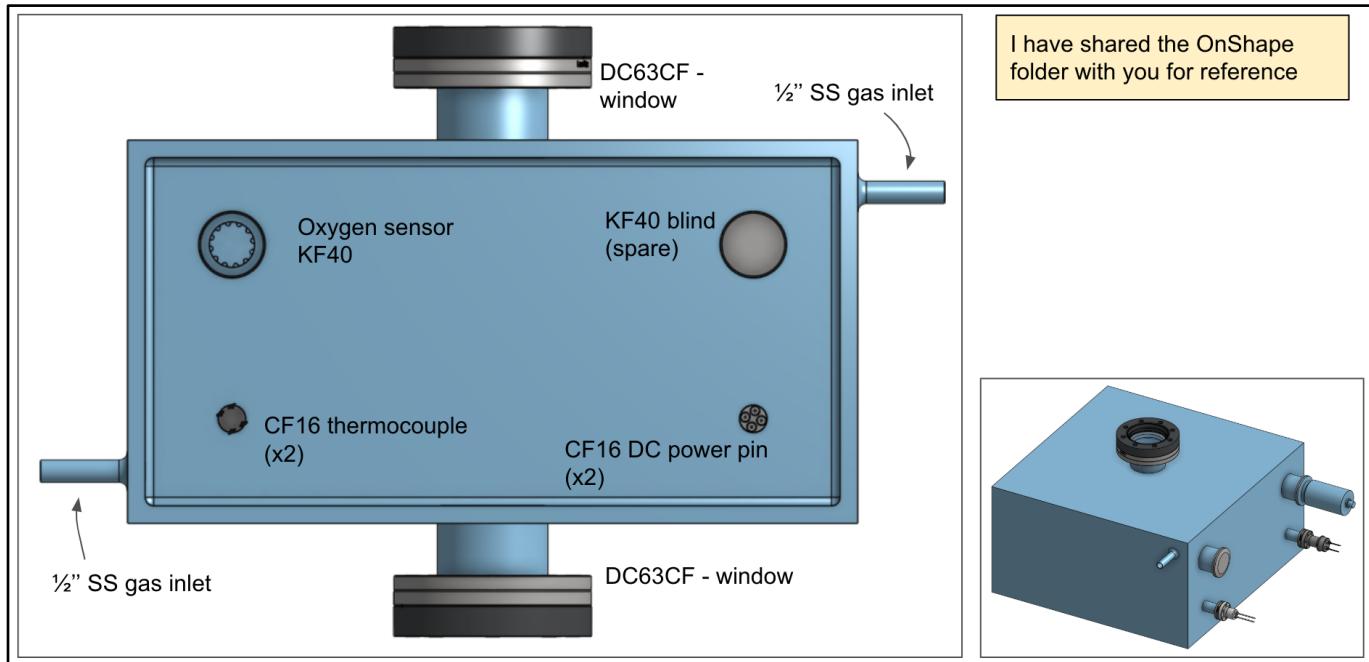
(left) Chamber with lid removed. A hingeless design is shown, which can be easily extended to one with a hinge without introducing spatial interference with other components. (right) Back view.
